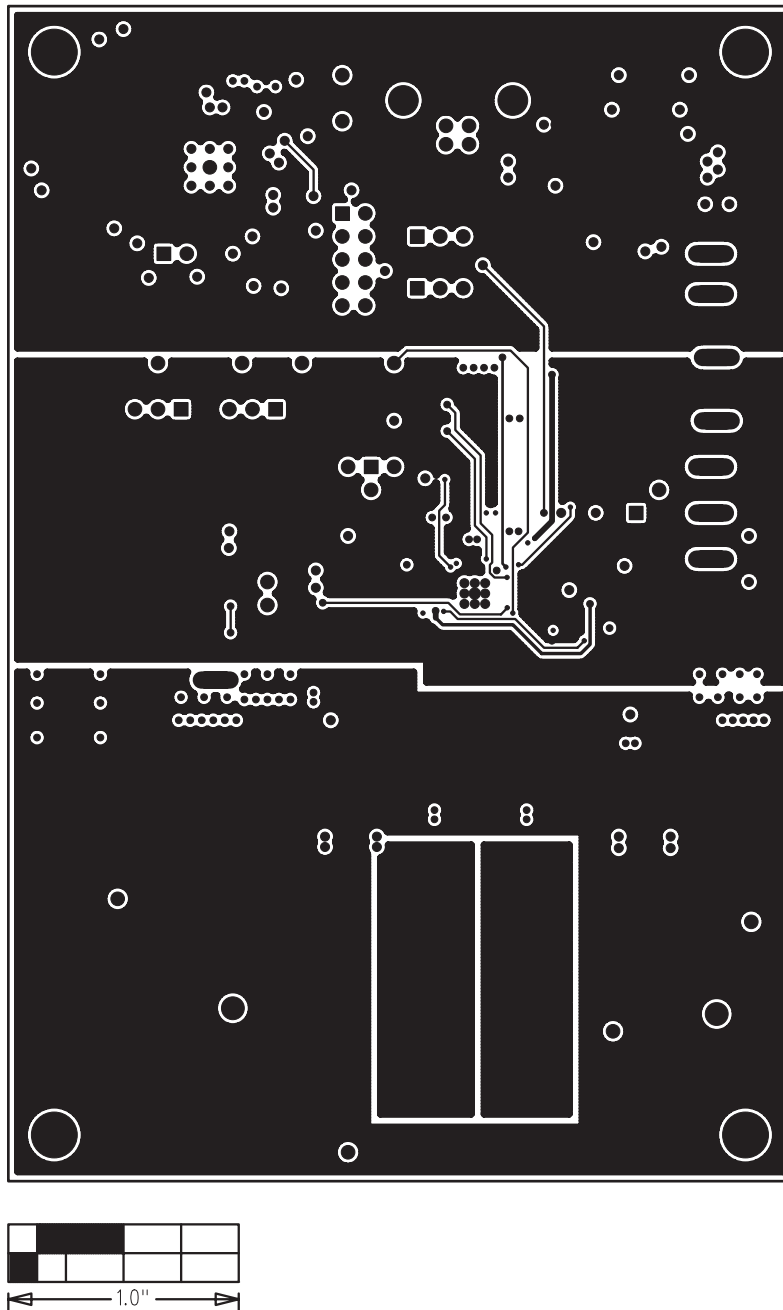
MAX17480 EV Kit PCB Layout—Internal Layer 4
